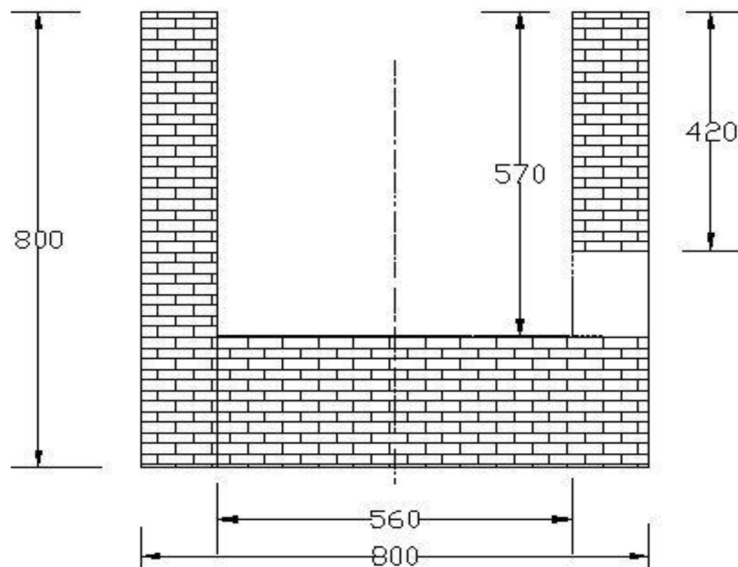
Fig. VIII: Furnace Wall Lined With Bricks (All dimensions are in mm)
